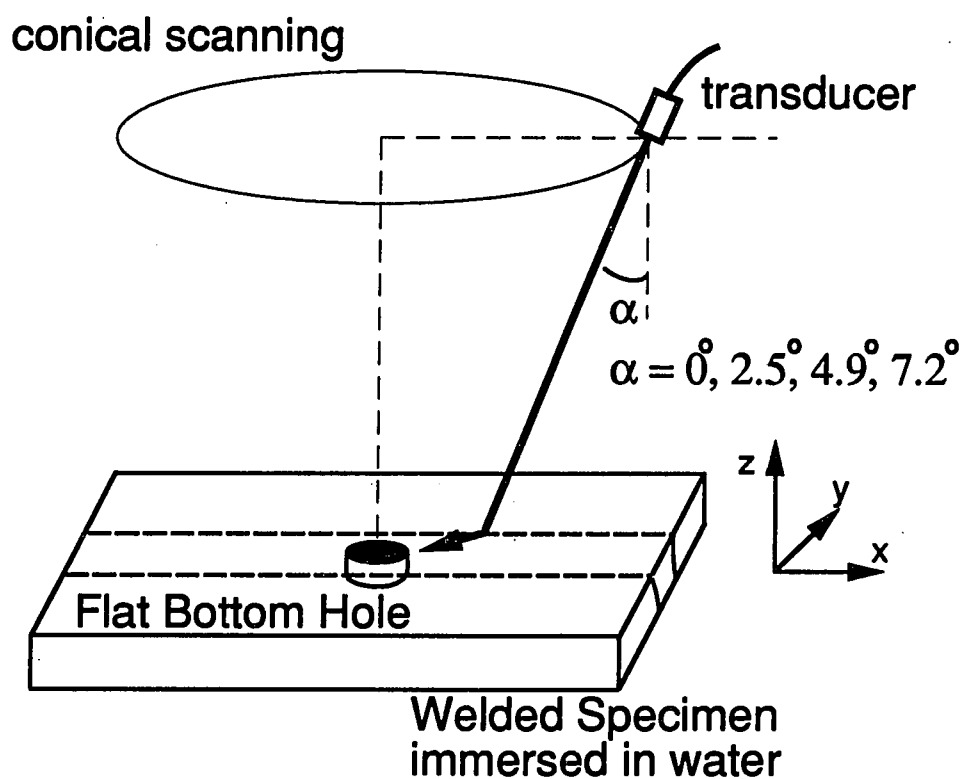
Schematic diagram of the TOFE sizing setup for 5mm diameter flat-bottom holes fabricated in in a mild steel welded specimen (immersion testing).
